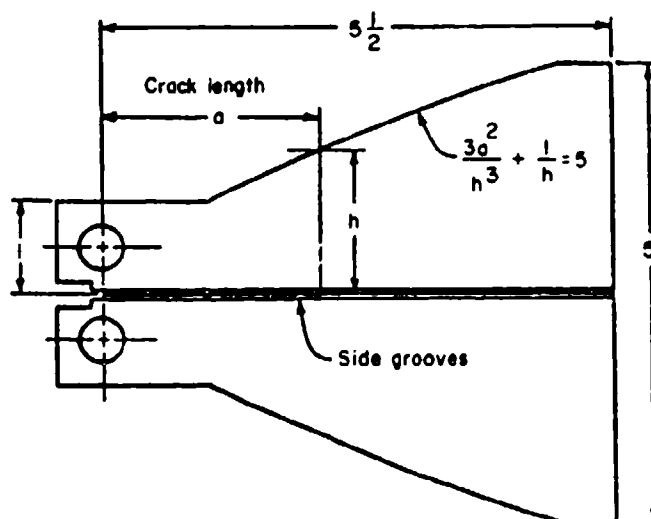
Typical Tapered Double Cantilever Beam (TDCB) Specimen with Side Grooves.
